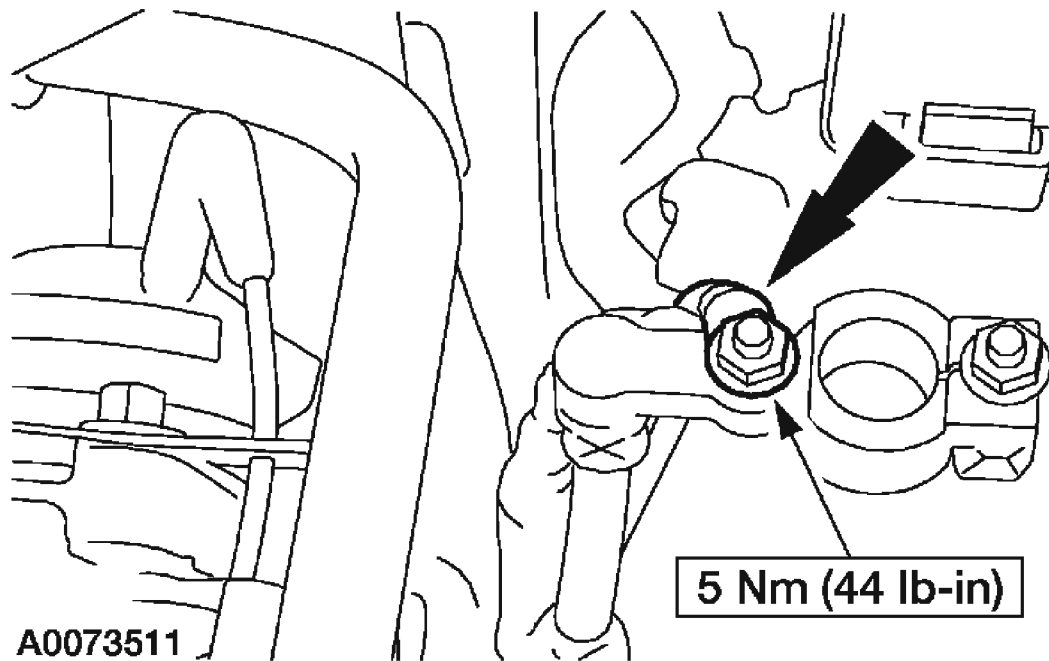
Removing Auxiliary Positive Battery Terminal Nut And Separating Auxiliary Battery Cables From Positive Cable End
